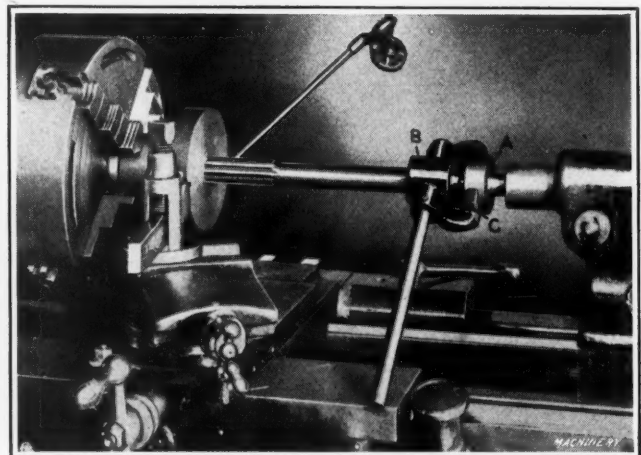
Self-centering Reamer-holder made by the Woodall-Basch Tool Co.
